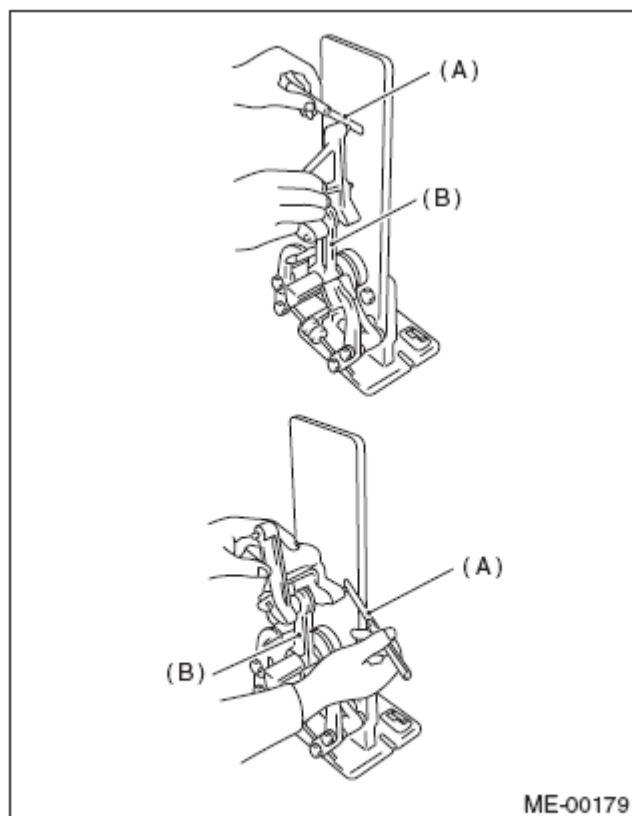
Measuring Clearance Between Piston Ring And Piston Ring Groove With Thickness Gauge
